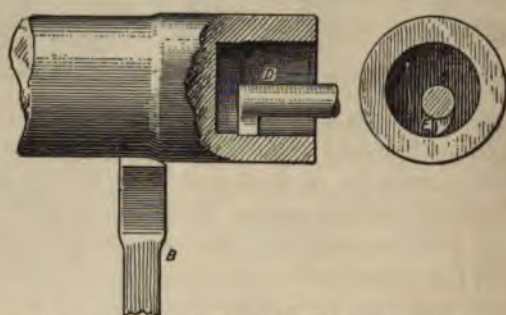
Setting Lathe Tools for Finishing Cuts.
